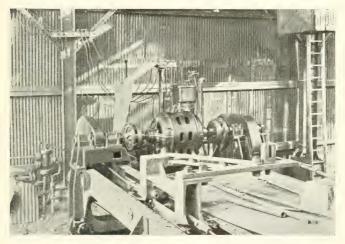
20 HP, 875 R.P.M. MOTOR DRIVING CHARGING BUGGY OF BENDING ROLL FURNACE
